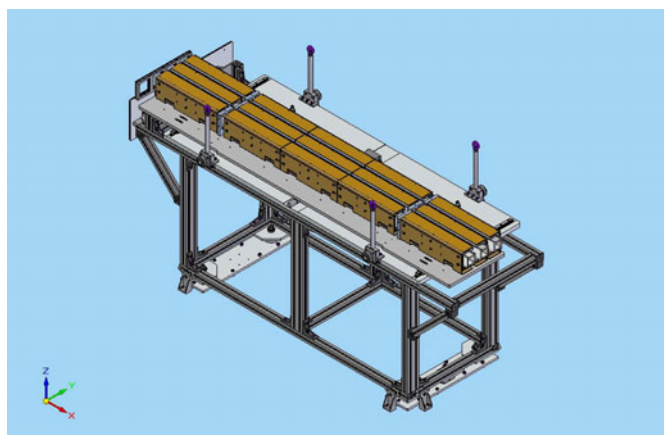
Schematic drawing of one frame with a table and mounted optics.
